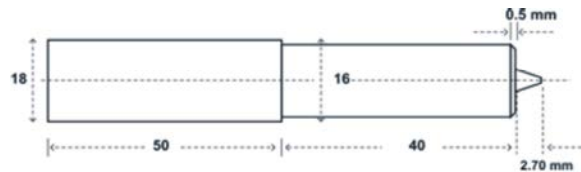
Tool and work piece Dimension (conventional joint) [9]
